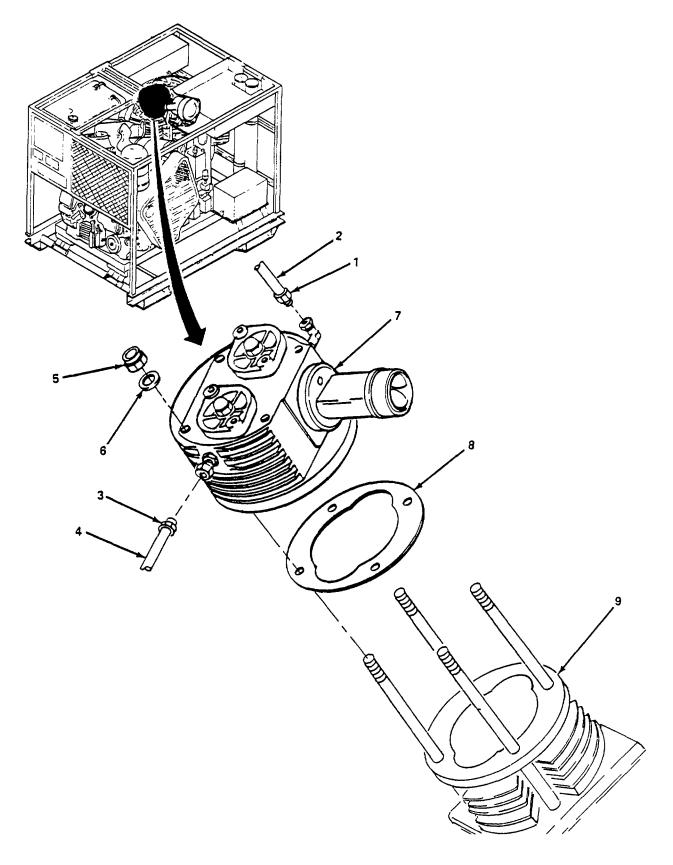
1st Stage Valve Head Assembly, Replace.
